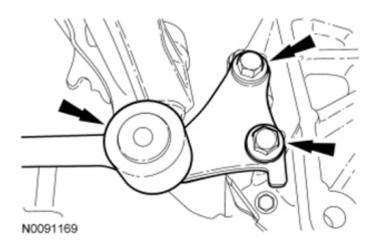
Locating Subframe Bolts Courtesy of FORD MOTOR CO.
